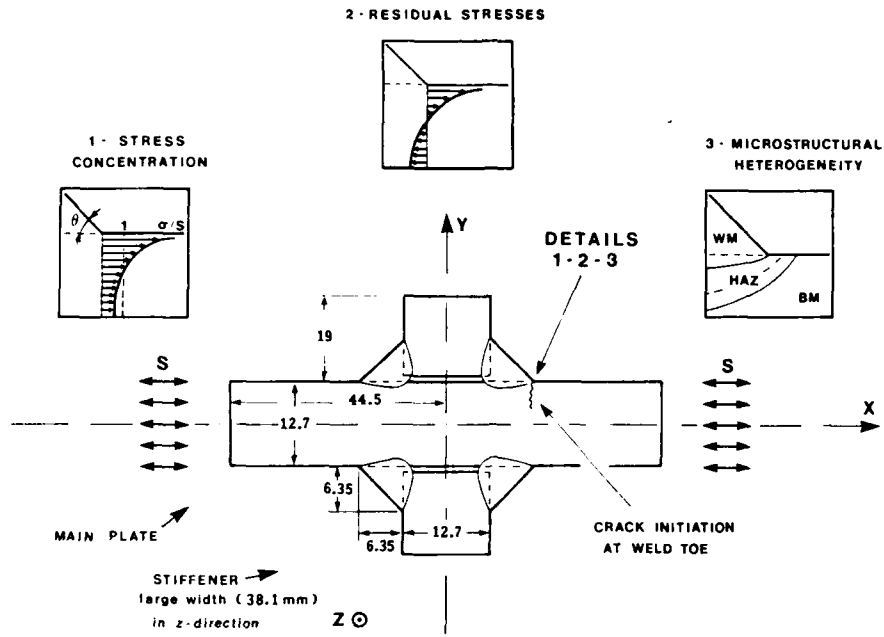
The cruciform welded joint (dimensions in mm).
